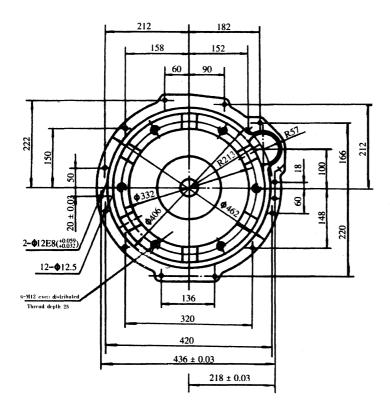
Outline drawing for 495, 495G, K4100 diesel engine
